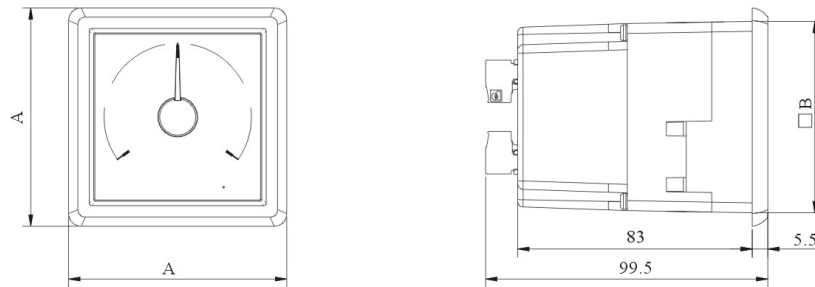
Dimension(Panel Mount) 图1 面板内嵌式尺寸
